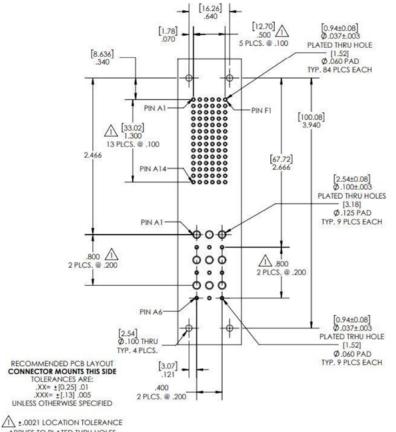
Figure A. PCB layout for i2 MX receiver, Part # 310 130 202. Thru hole and pad diameters are for VPC QuadraPaddle Adapter Contacts, Part # 610 138 117. The size of these holes may be different if a header from a different manufacturer is used. Connector mounts this side.
